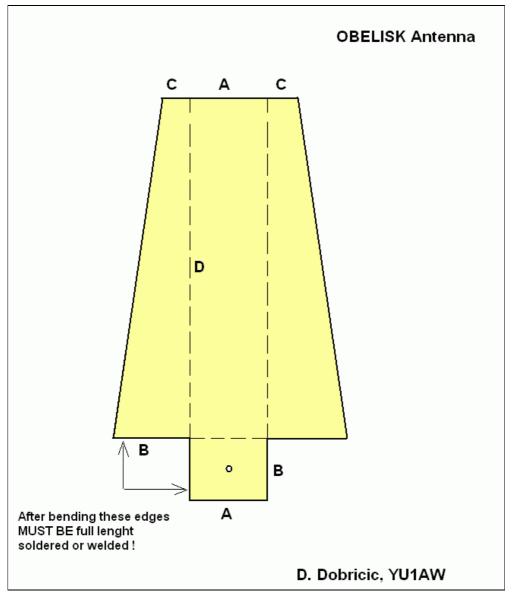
Shape and dimensions of cut for Obelisk antenna for 2.4 GHz.
